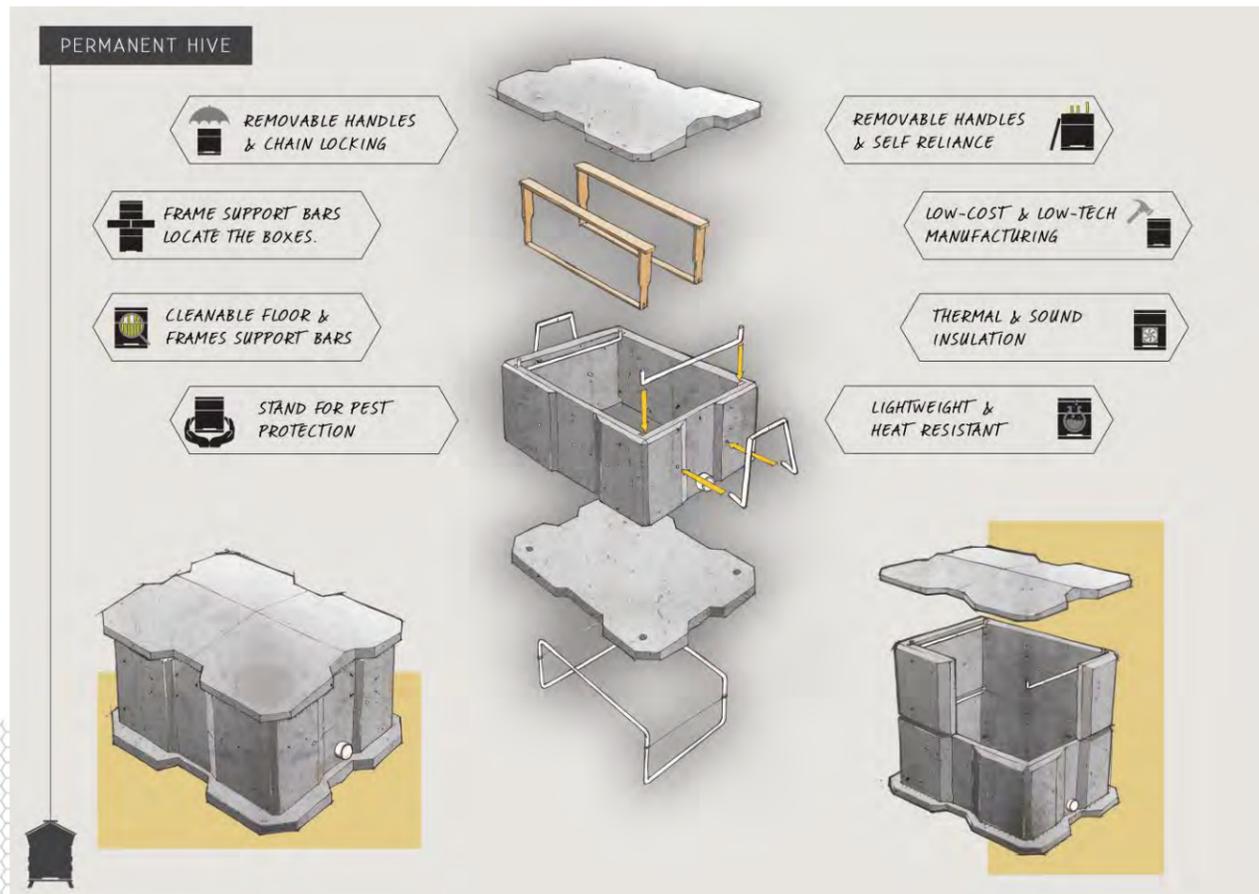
Final design & engineering sketches of concrete hive, 2015 (illustrations by author).
